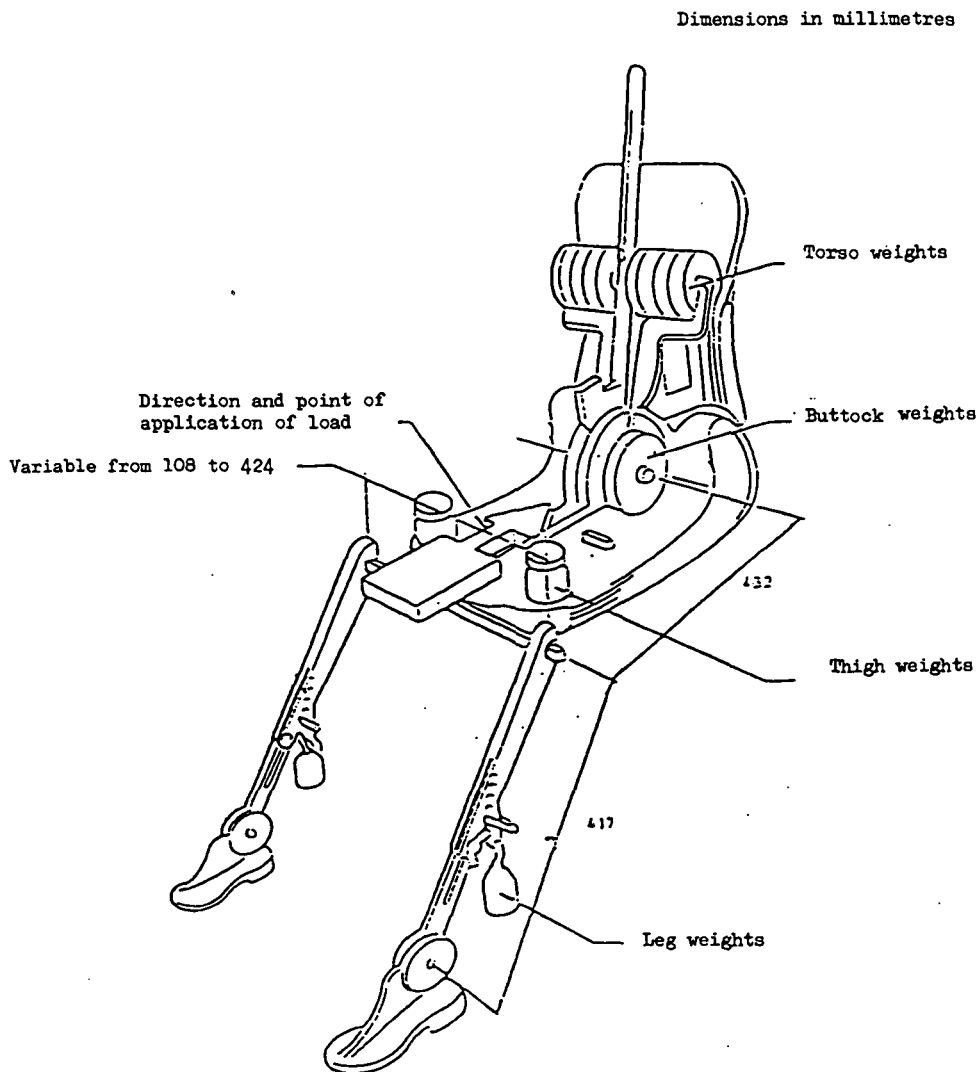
DIMENSIONS OF THE DH MACHINE ELEMENTS AND LOAD DISTRIBUTION
